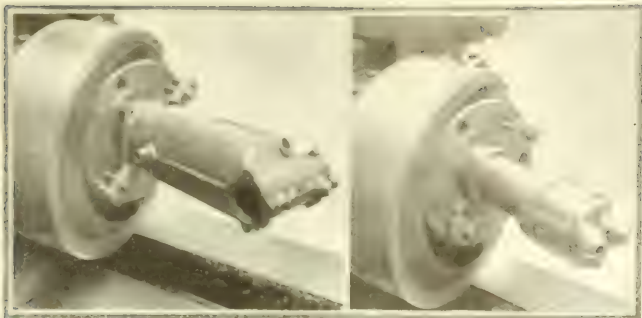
INDEXING FIXTURE FOR LE RHOSE ENGINES. LEFT: SIDE VIEW. RIGHT: FRONT VIEW.
